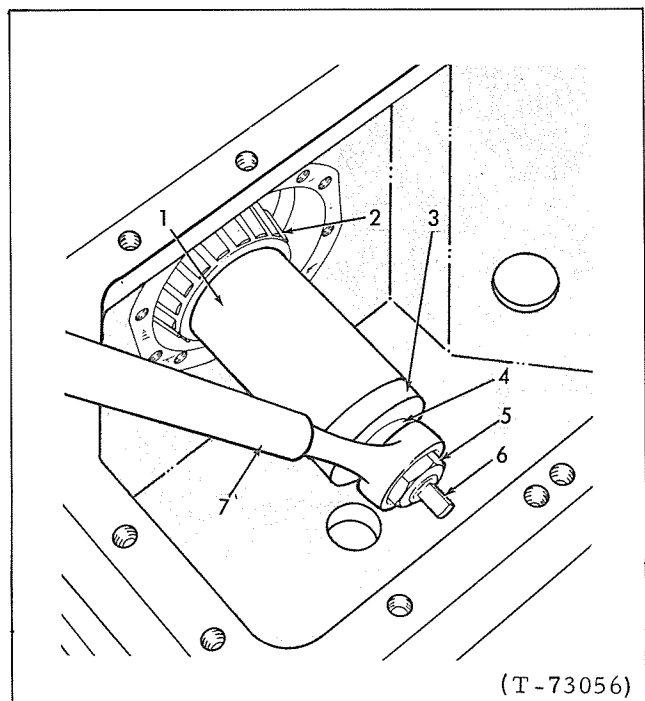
INSTALLING BEVEL GEAR SHAFT-BEARING CONE
